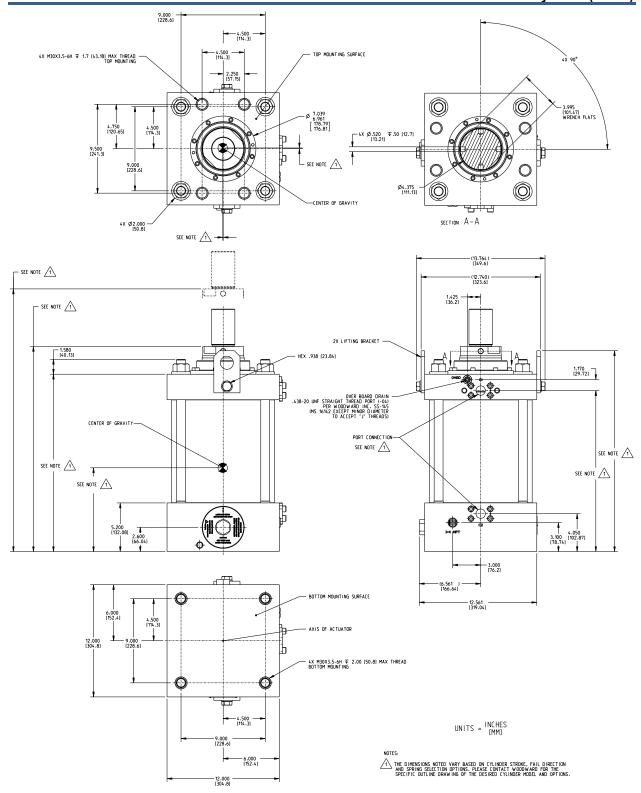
VSPC 10 inch bore, Installation Dimensions for Remote Cylinder
